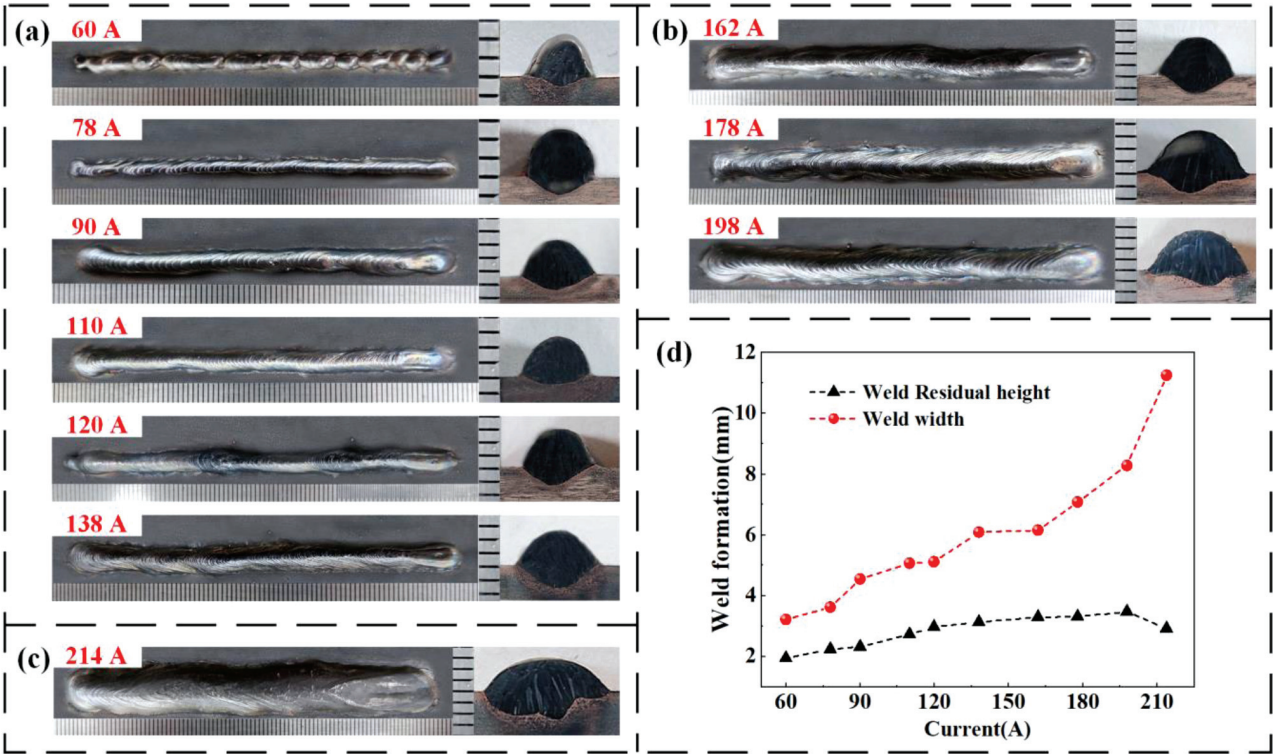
Weld formation: a) short circuit transfer, b) mix transfer, c) spray transfer, d) weld formation at different welding currents
